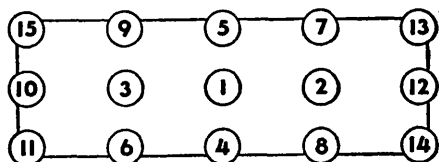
F ur cylinder head tightening. 1935-50 L-Head
